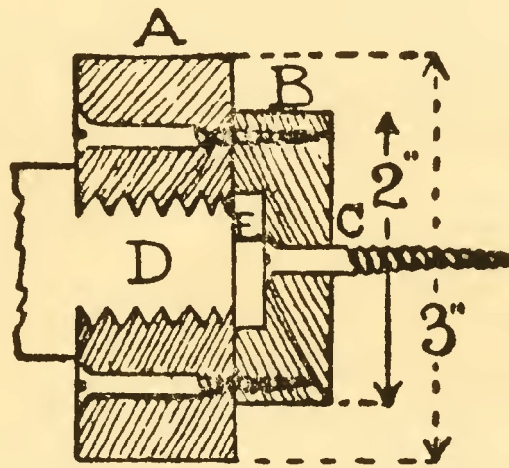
SECTION OF SCREW CHUCK, SUITABLE FOR USING WHEN LATHE HAS NO FACE PLATE.
